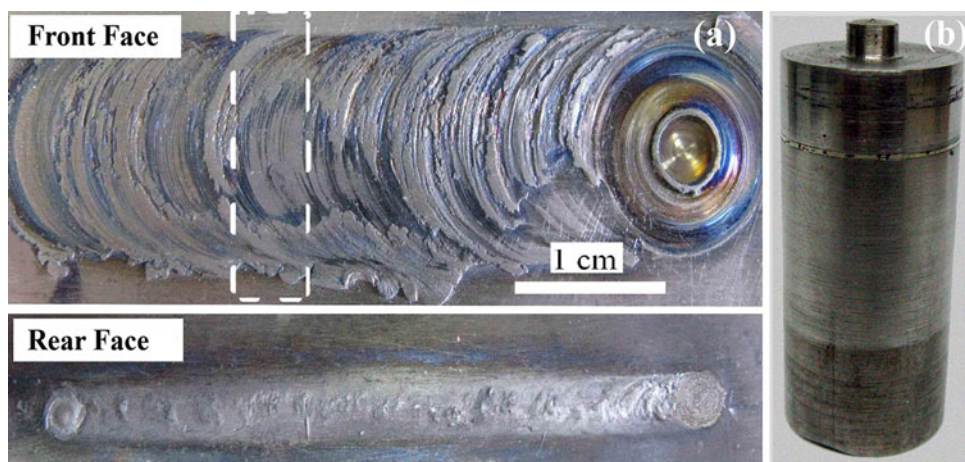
(a) Joint formed by condition 4III with the tilt angle of 1°; (b) Used tool in condition 4III after FSW
